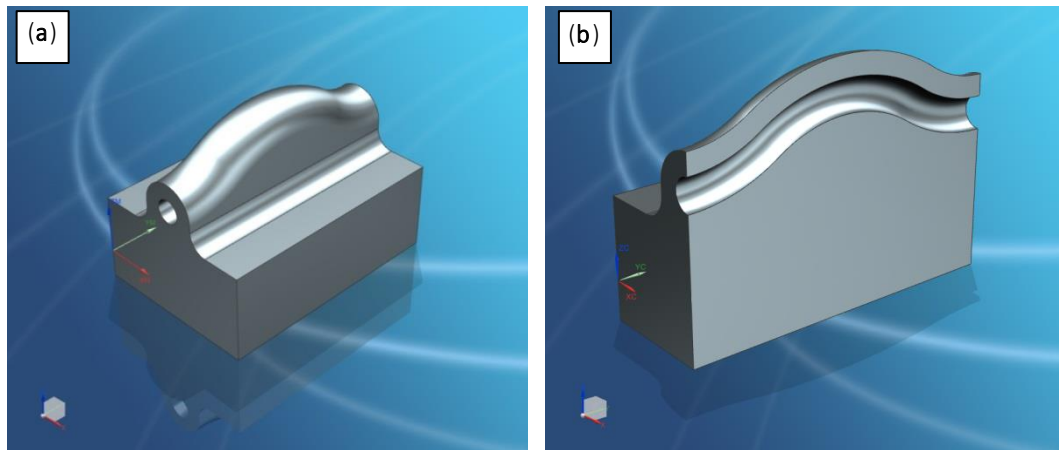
(a) Isometric view; (b) cross-section of the 3D conformal cooling CAD model.
